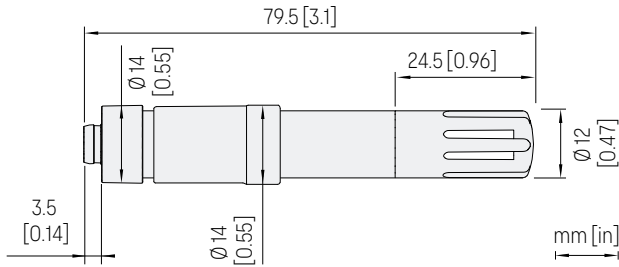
HMP63, HMP63T, HMP115, and HMP115T probe dimensions
